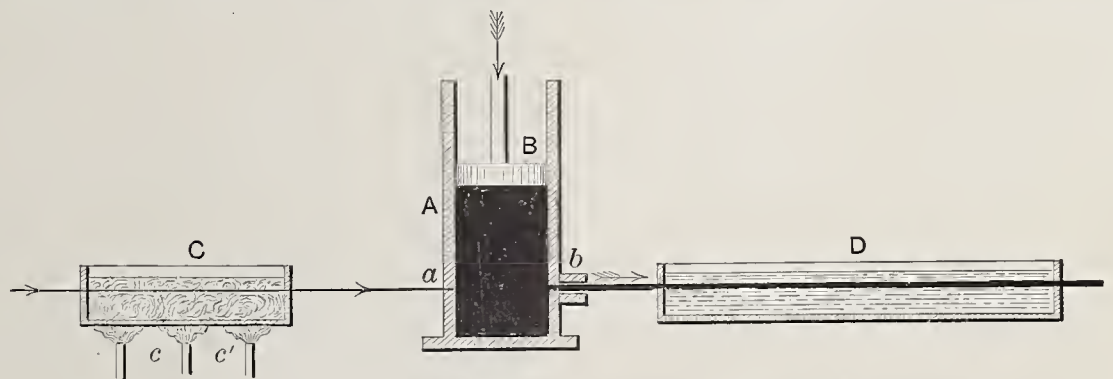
AN EARLY FORM OF GUTTA-PERCHA COVERING MACHINE
